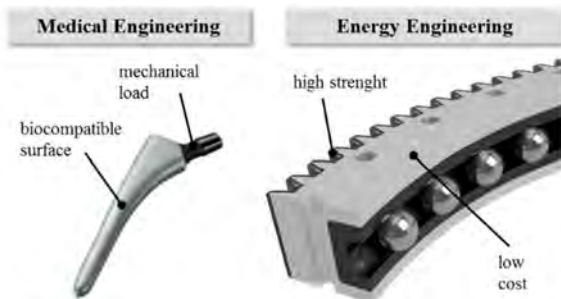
Examples of multi-material components: femoral implant (left) and slewing bearing (right).
